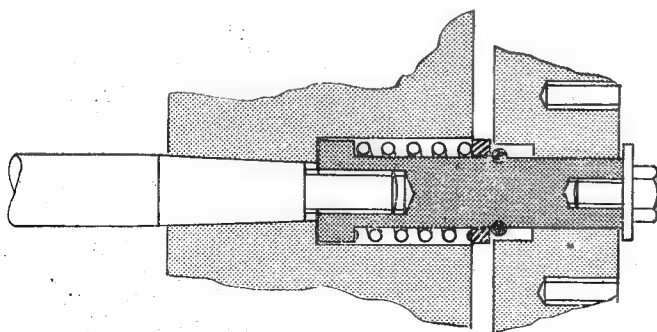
Suggested hub details for engine-mounted unit—not to scale
